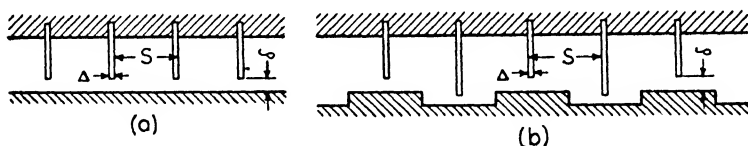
Labyrinth types: (a) straight-through type; (b) staggered type.
